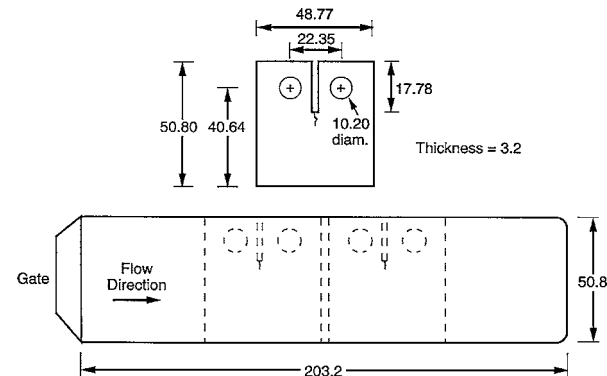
Schematic view of injection molded plaque and Compact Tension (CT) sample used for selected fatigue crack growth measurements.
